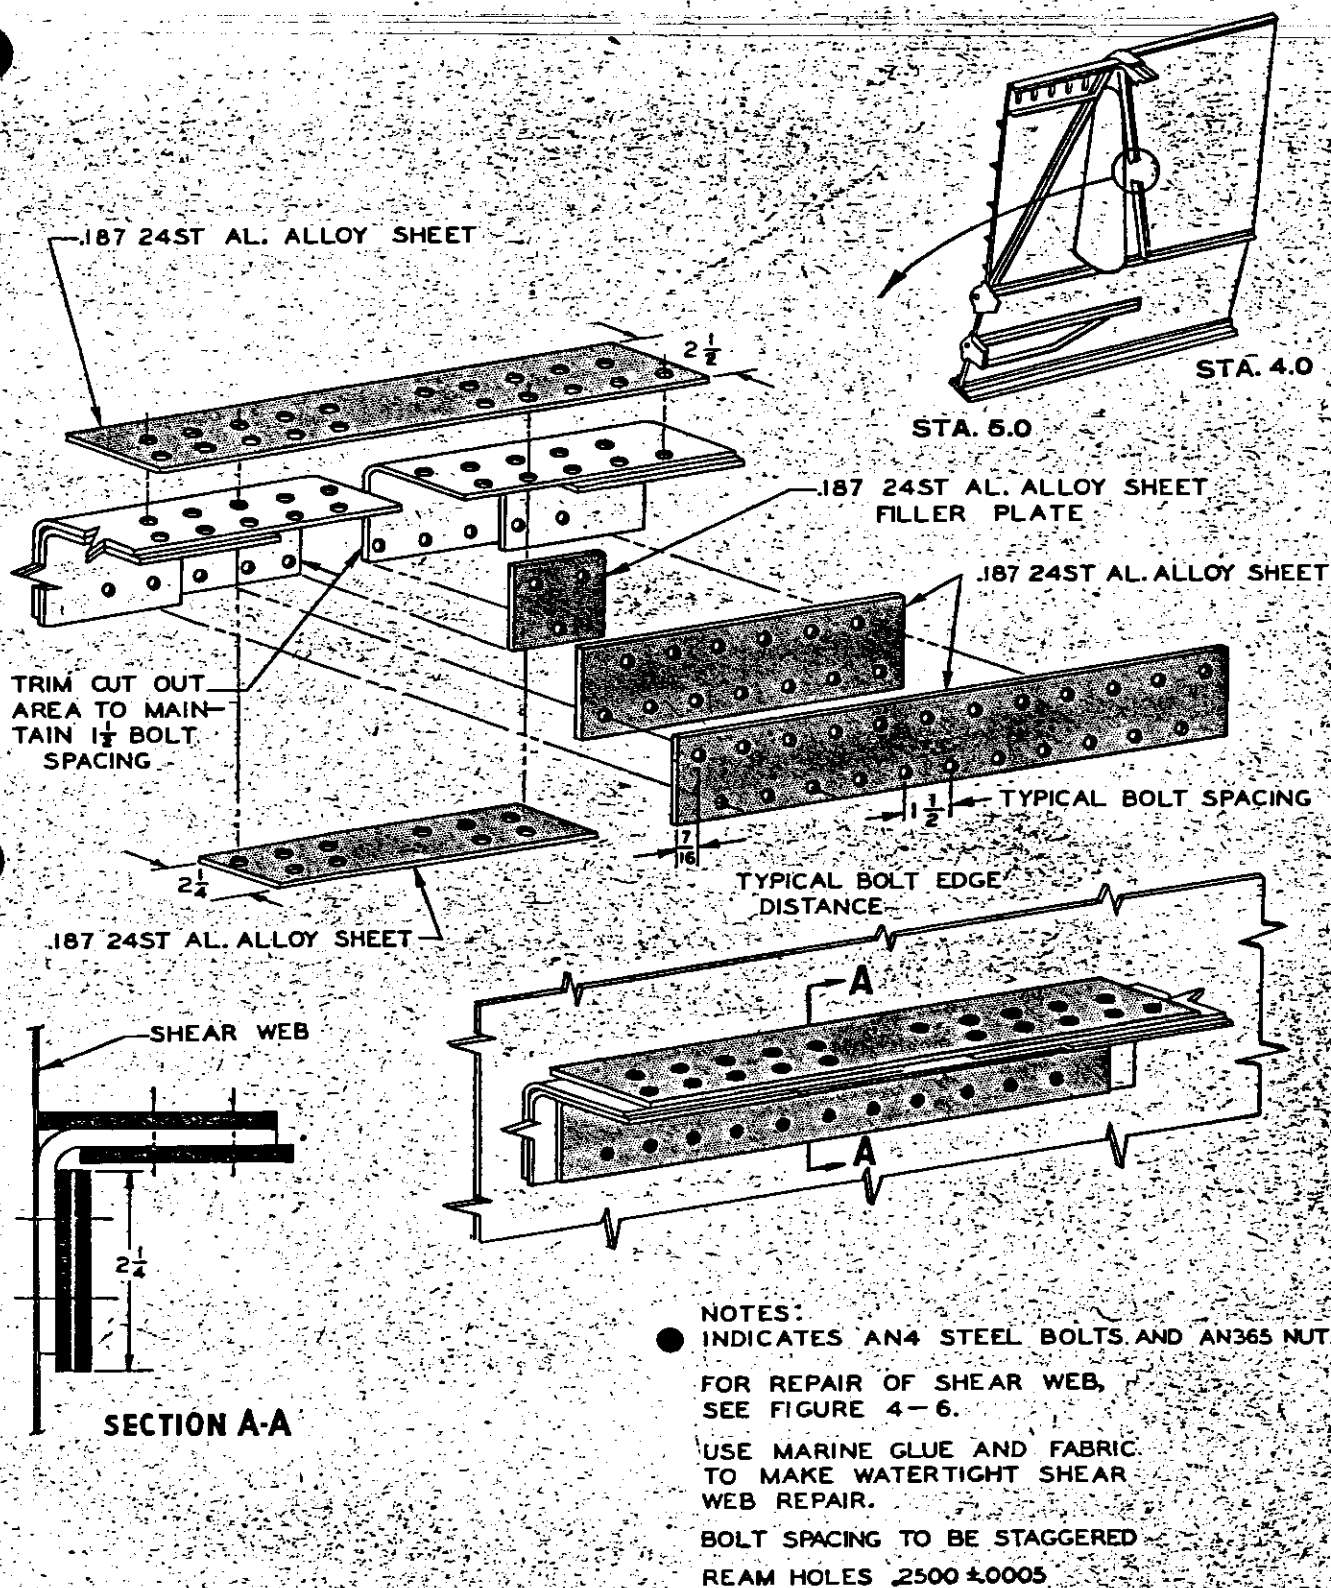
(Sheet 1 of 5 Sheets)—Main Wheel Well Enclosure Repair
